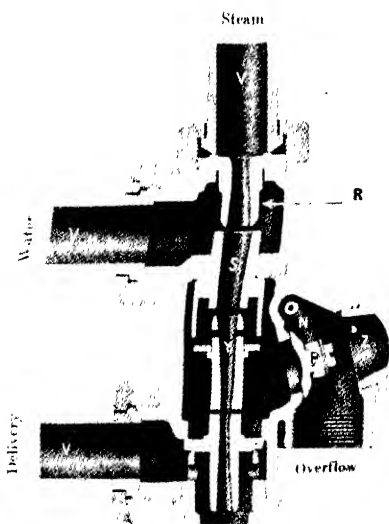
THE "PEMBERTHY" AUTO INJECTOR
